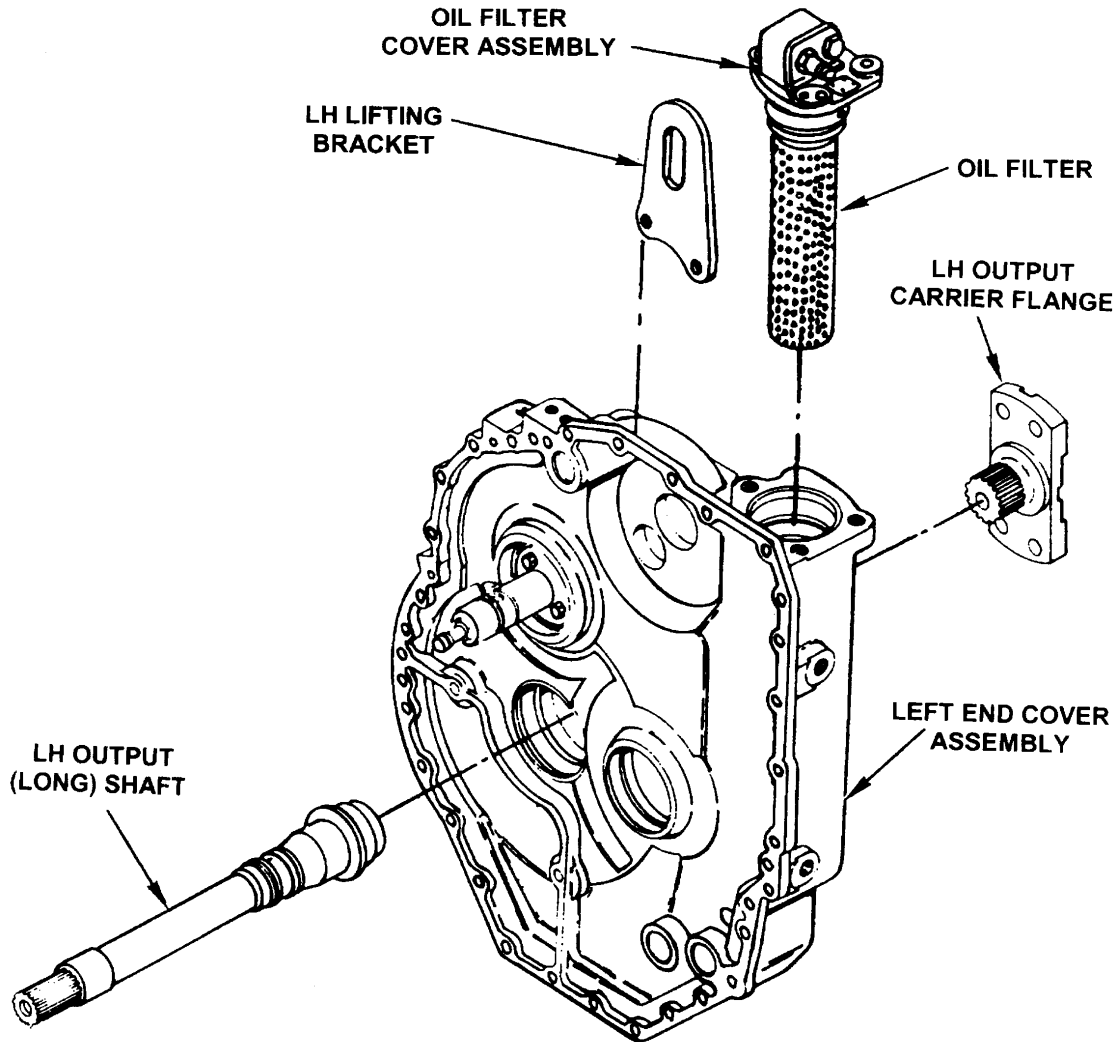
Exploded View of Major Components Left End Cover Assembly.
